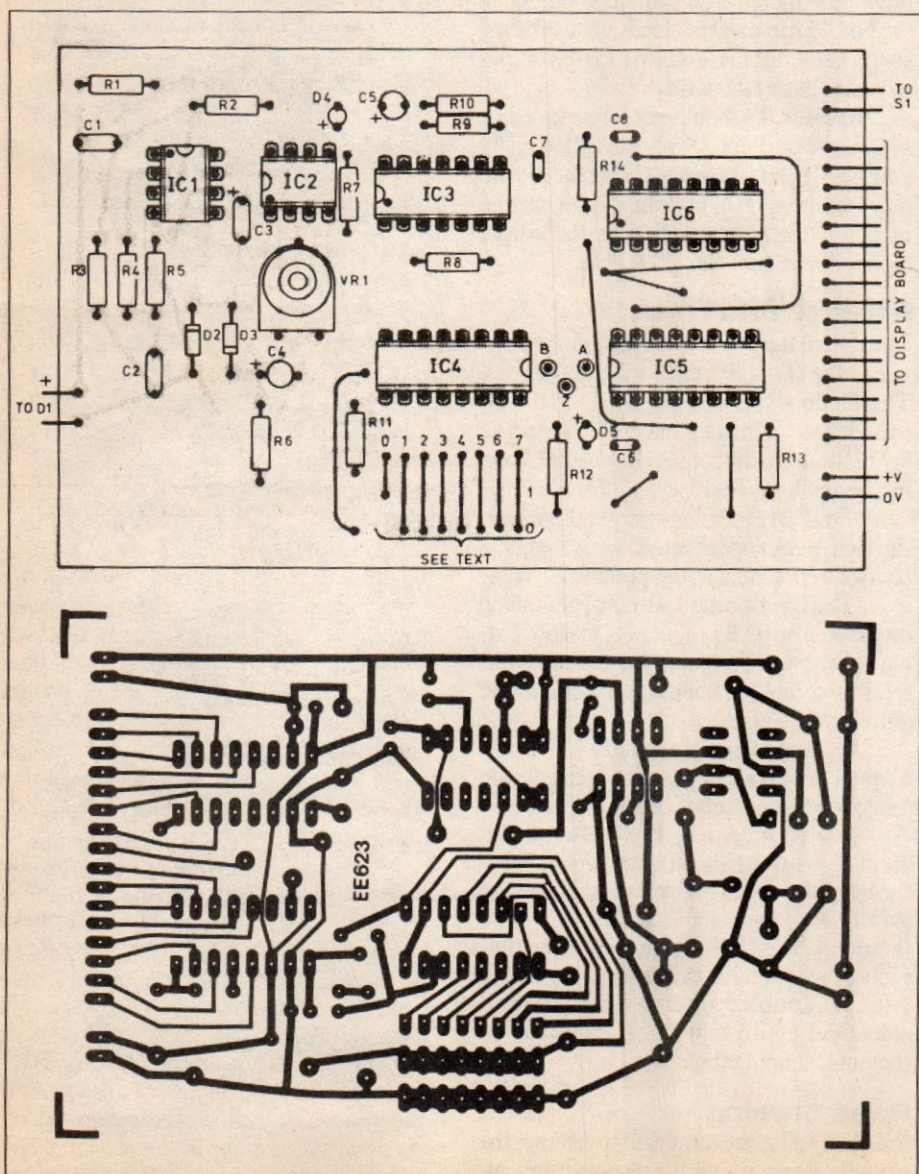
The component overlay (top) and the PCB for the Object Counter.
